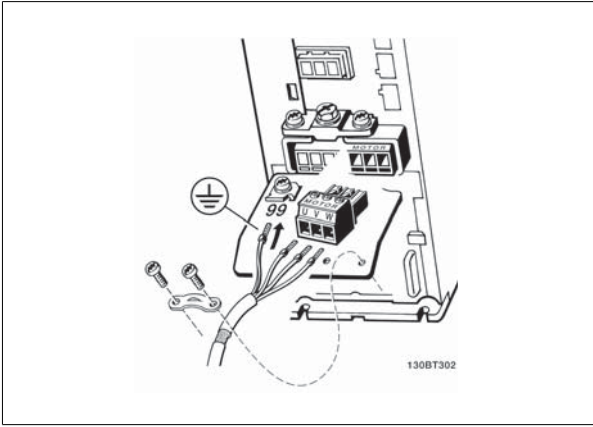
Motor connection for units sizes 12 and 13 IP20 Open Chassis drive types (230V to 5HP, 460V/575V to 10HP)
